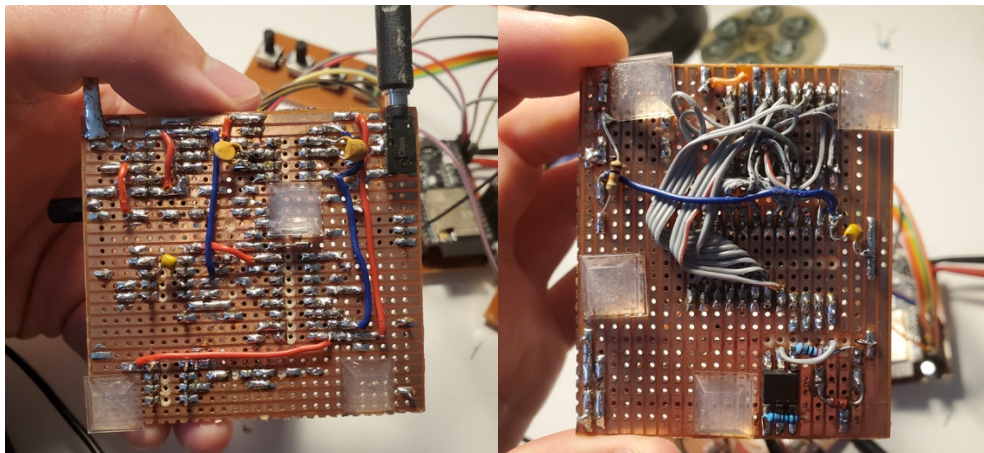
BOTTOM DETAIL OF FINAL PERF BOARD ASSEMBLY
